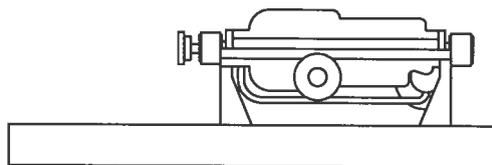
Pump type BB3: Horizontal, axial split, multistage, between-bearings design
